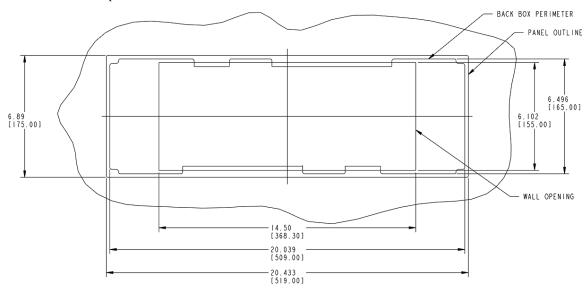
MXD-1901-PAN-L Installation Dimensions (front view)
